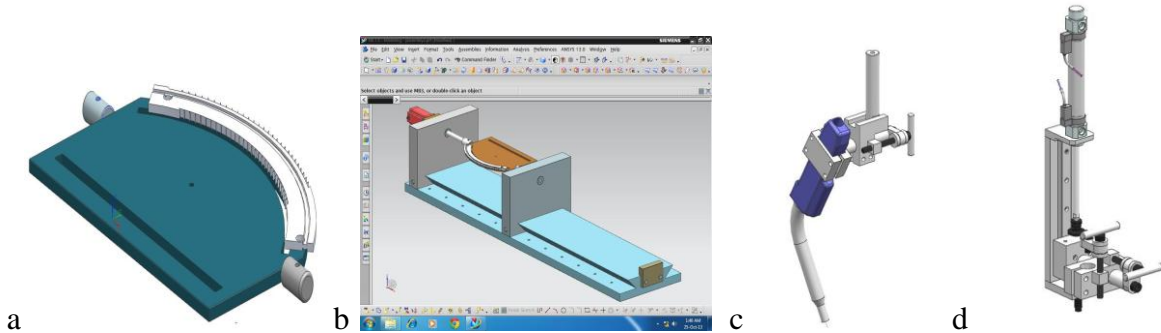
(a) Rotary table; (b) Universal fixture; (c) Welding torch; (d) Drive system for torch
